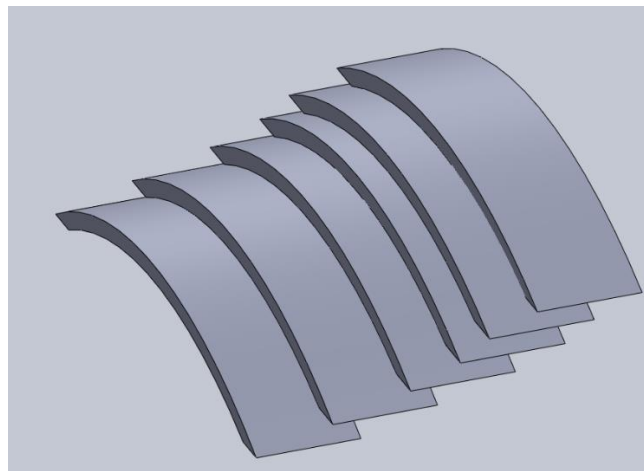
Final SolidWorks Model for Shoulder Pad Design
